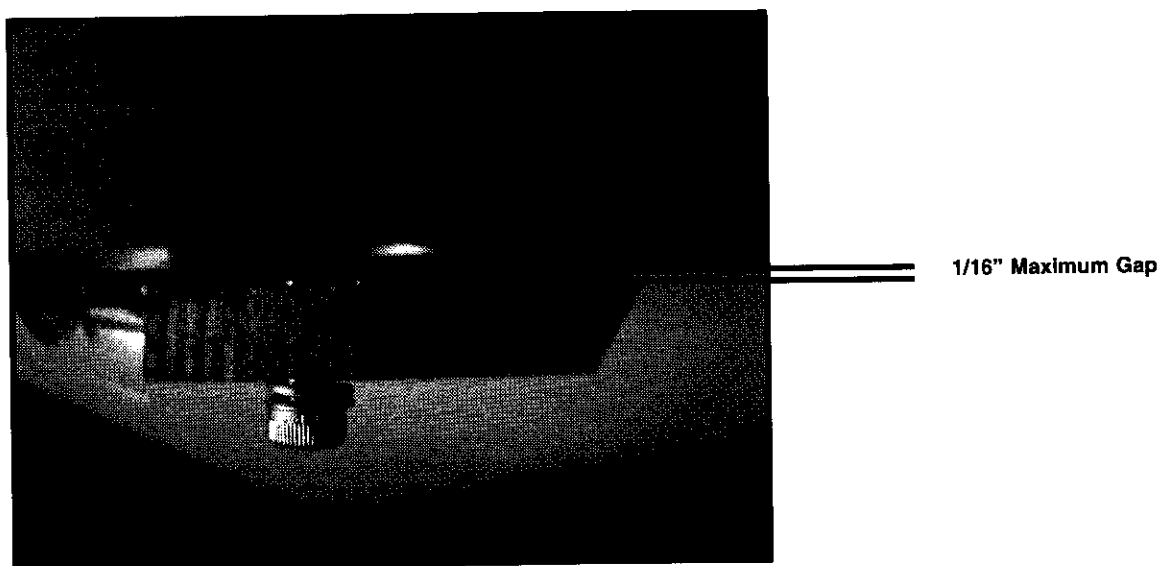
KNIFE ADJUSTMENT BOLT
